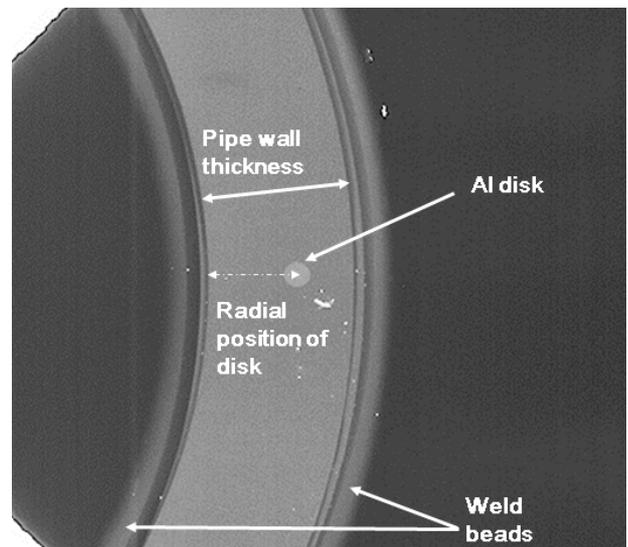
LOCATION OF ALUMINUM DISCS PRIOR TO BF WELDING
